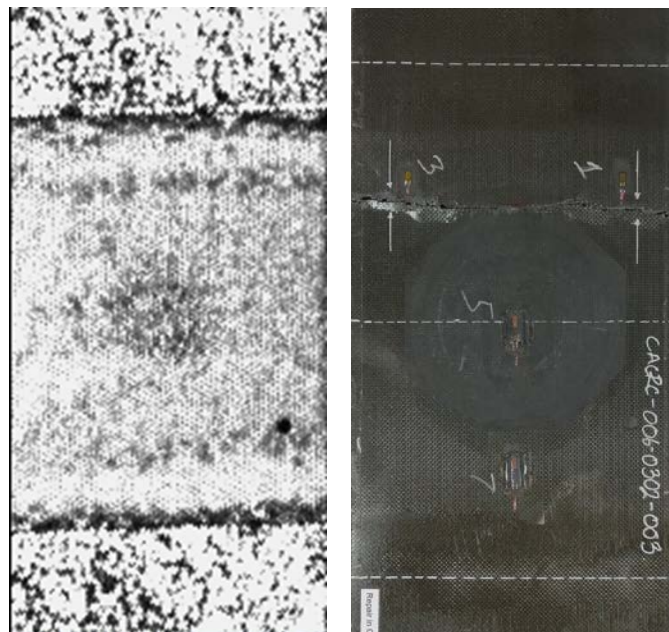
CACRC-006-0302-003-W-RC-ETW (element 27), TTU scan, pre- and post-test picture (facesheet compression failure through the repair)
